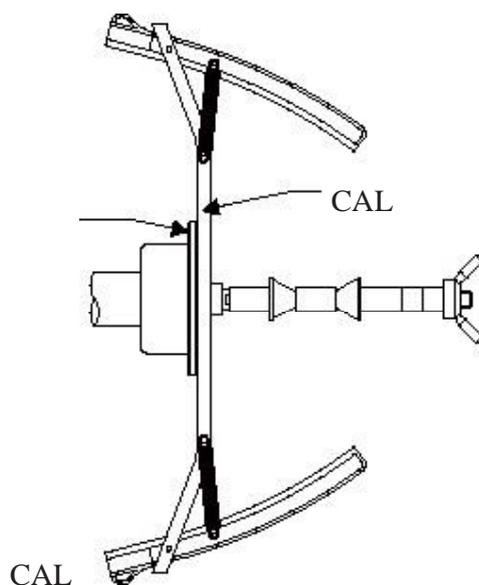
Application of the motorbike flange onto the shaft. Align the writing “Cal” on the flange and on the flange for motorbikes
